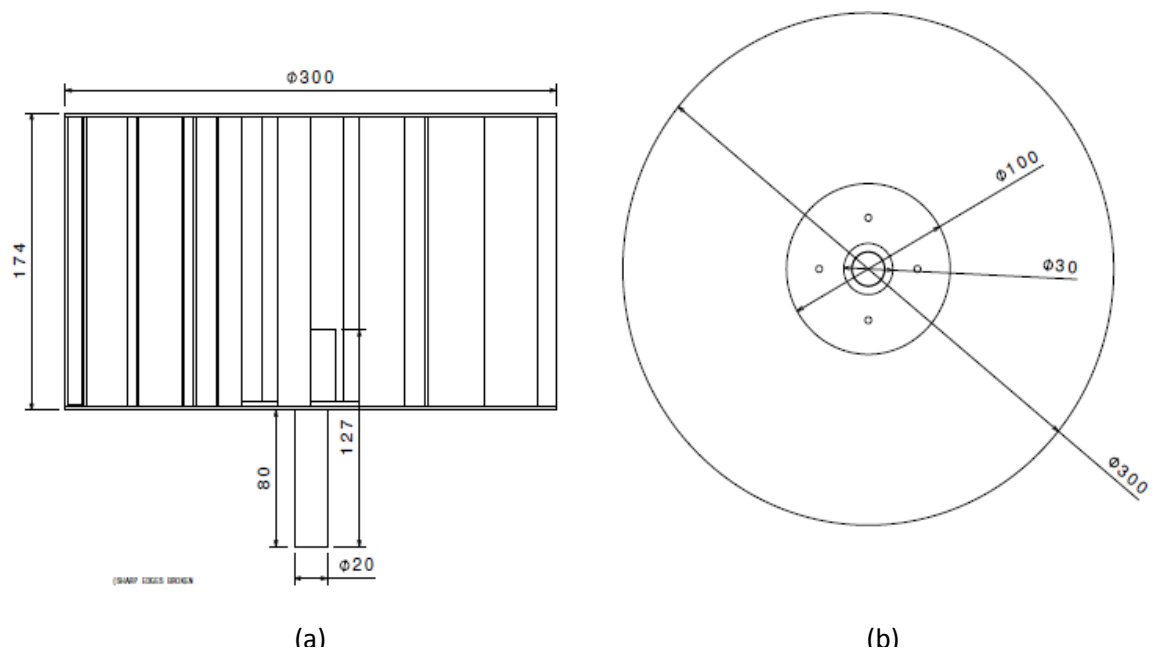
Wind turbine assembly (a) side view (b) top view
